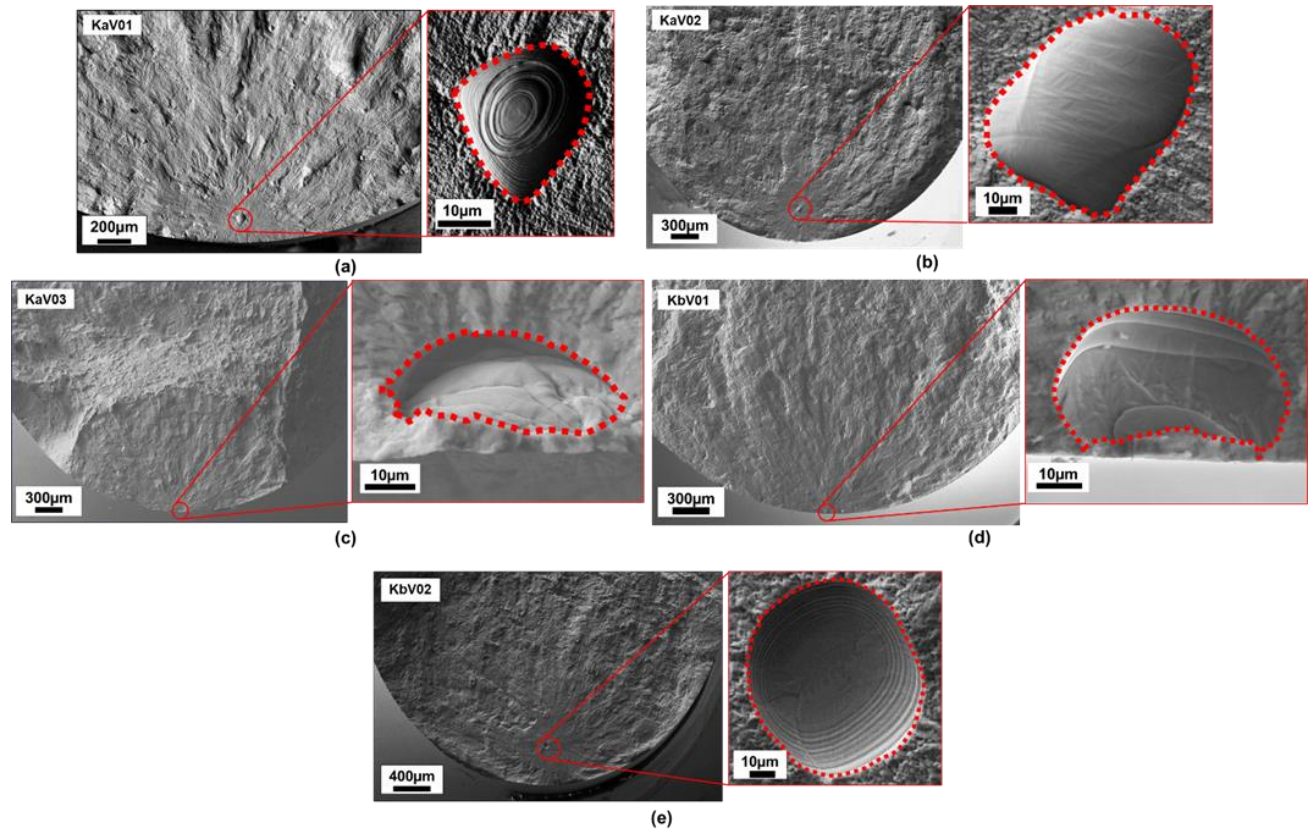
The critical defects of specimens (a) KaV01, (b) KaV02, (c) KaV03, (d) KbV01, and (e) KbV02 observed on the fracture surfaces and their contours. These five critical defects (except the one of specimen KaV03) can be classified as keyholes due to their relatively spherical shapes. It is difficult to classify the type of critical defect in specimen KaV03 only based on its contour outlined on the fracture surface.
